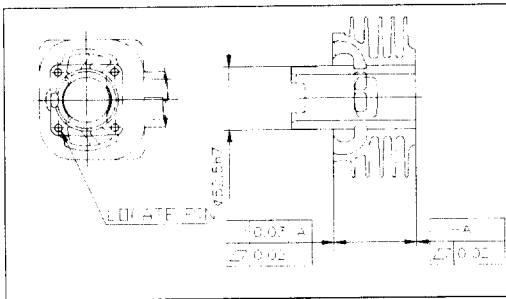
Machine datum of 2 cycle cylinder.
